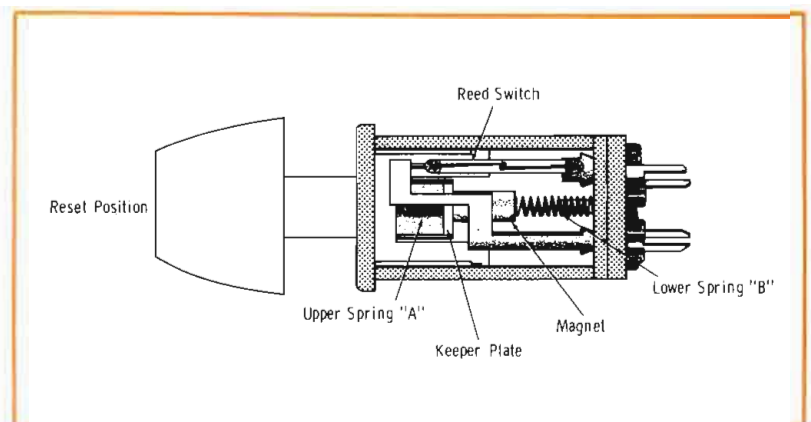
(B) Typical magnetic reed switch from a Cherry Electrical Prod. keyboard.
